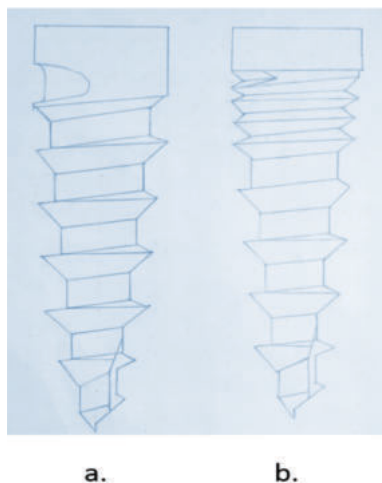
Two Types Of Thread Configurations A. Single Thread Shape B. Dual Thread Shape
